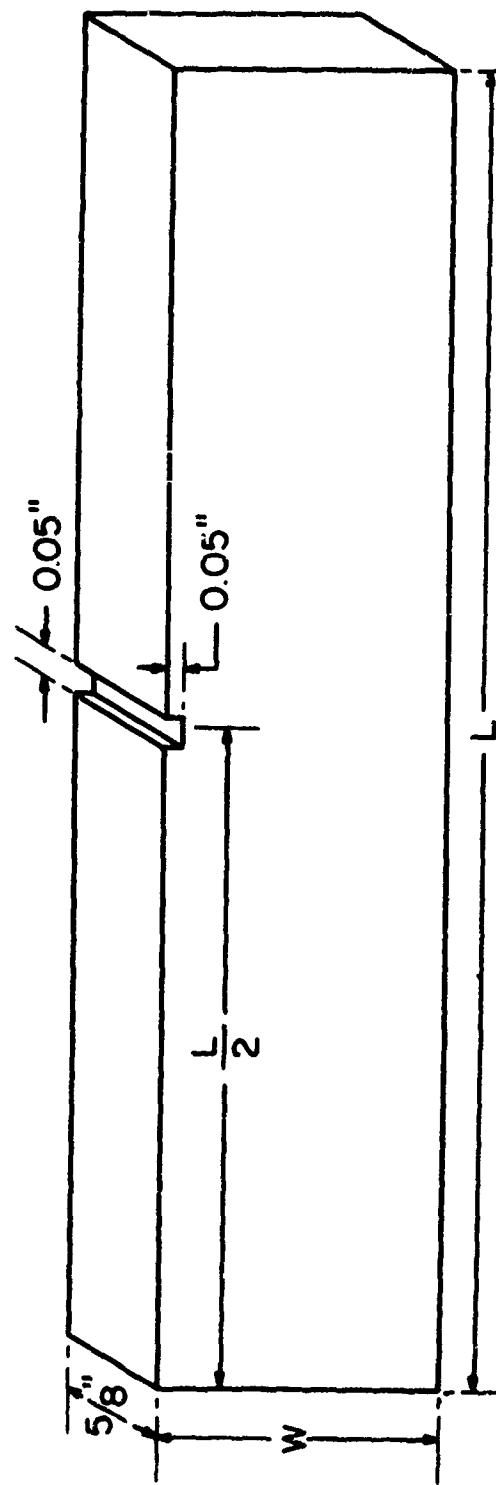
Preparation of $\frac{5}{8}$ DT specimen for E3 welding of crack - starter weld
